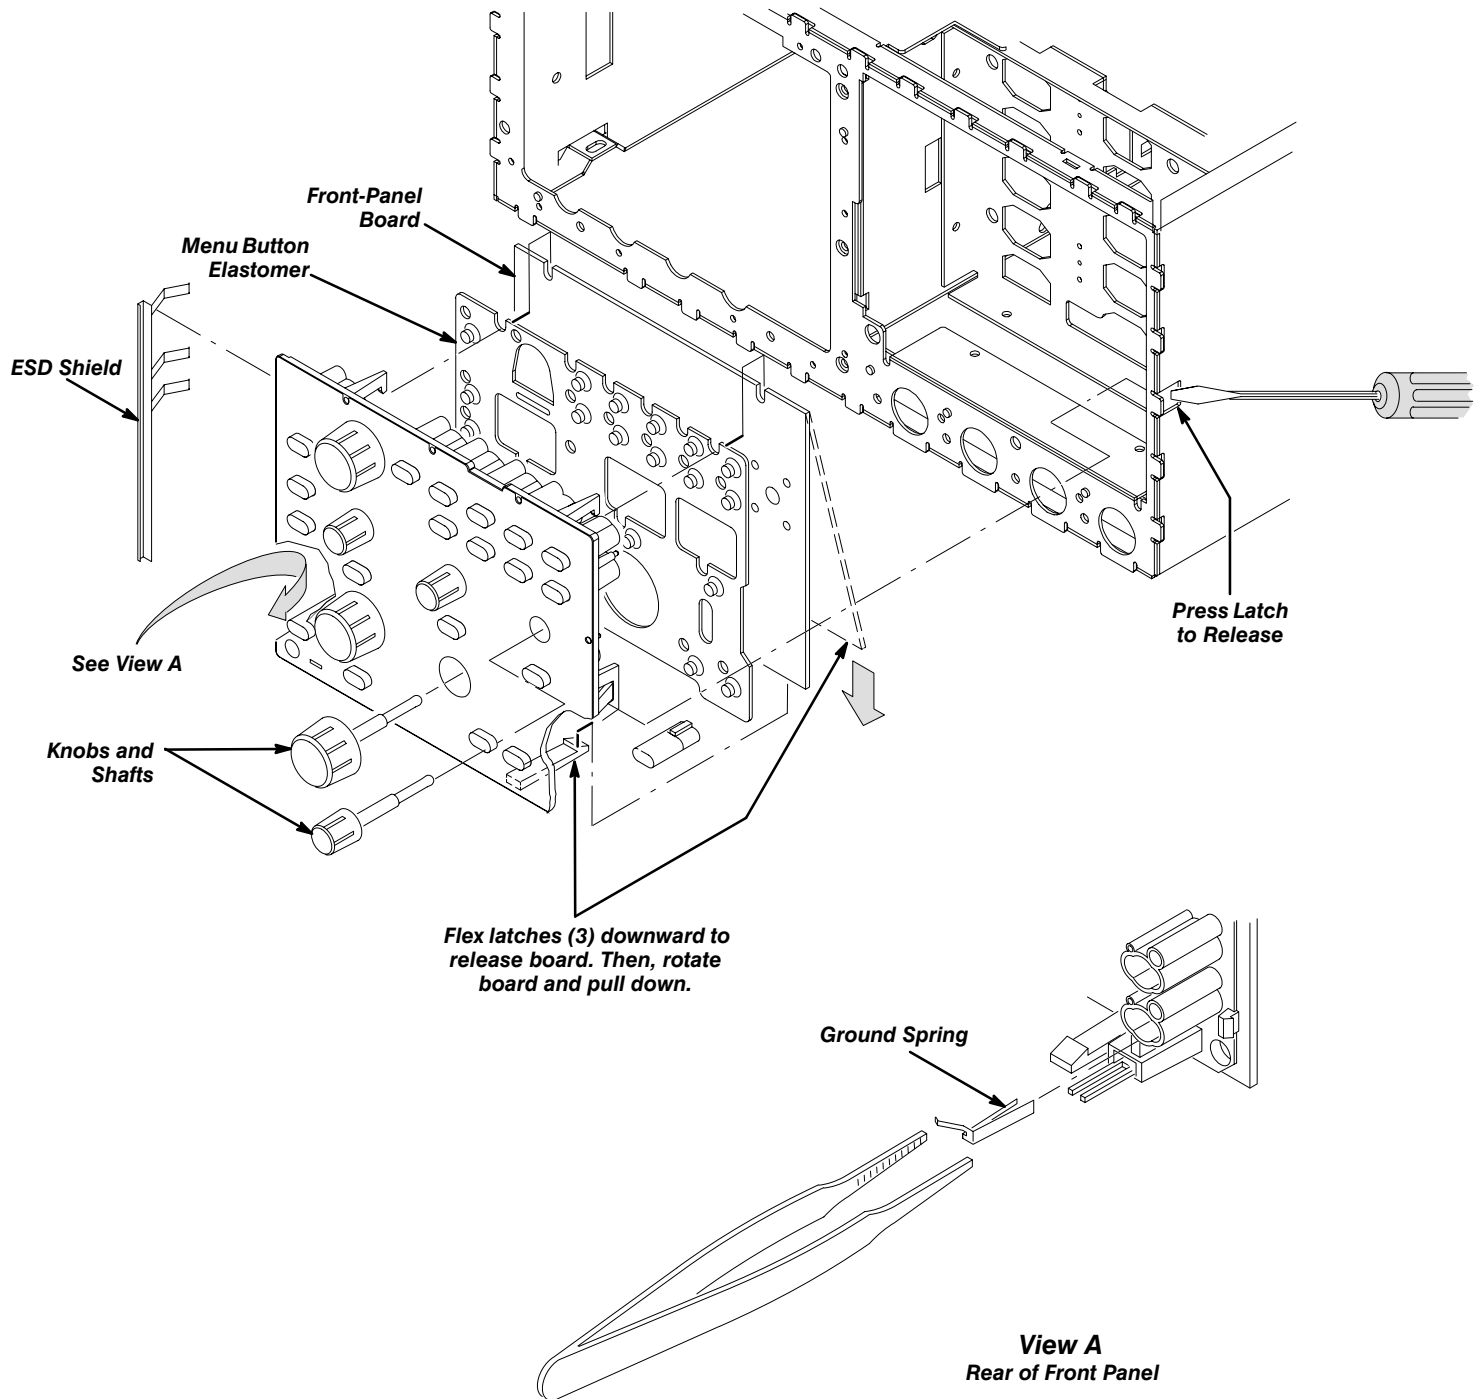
Front Panel Assembly and Menu Flex Circuit Removal
